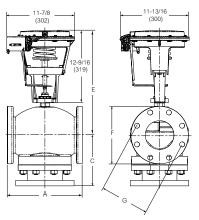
MK-6811 with Flanged 3-Way Globe Valves^a
